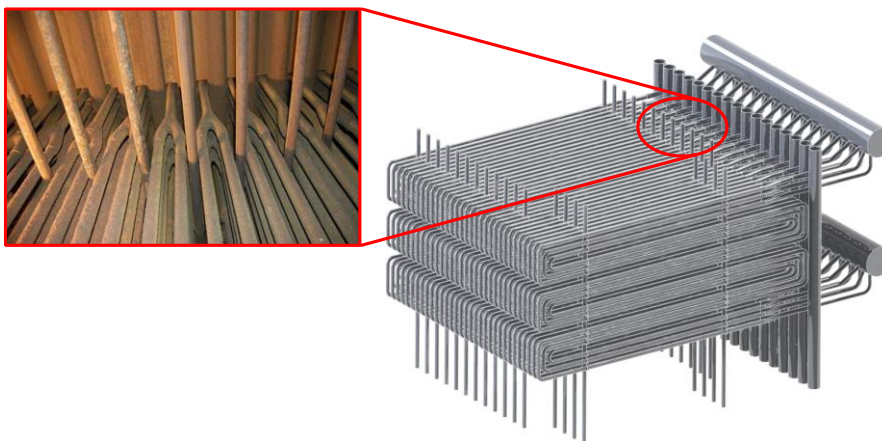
Modelled steam superheater and detailed view on “Y”-shaped tube elements
